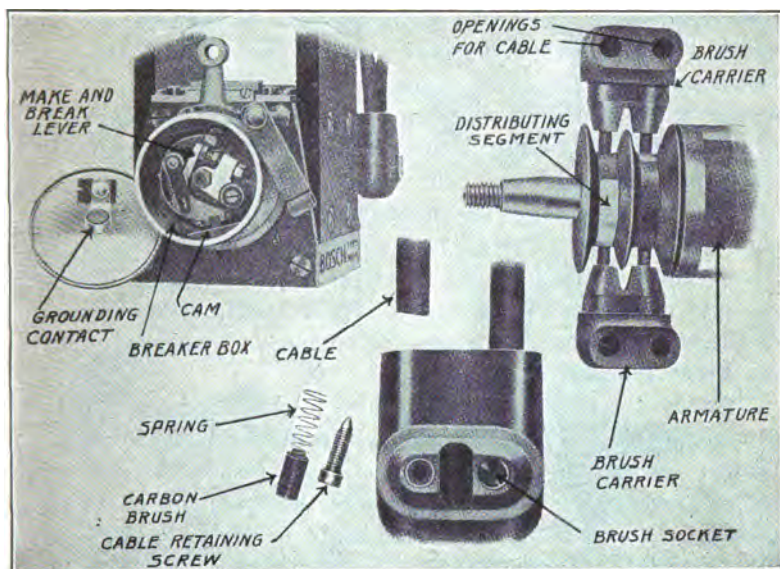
Contact Breaker and Distributor Arrangement of Bosch N U 4 High Tension Magneto.
